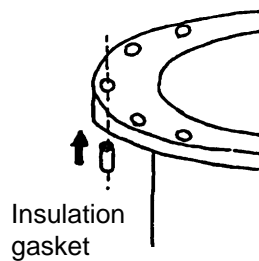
Laying the waterproofing gasket on the tank flange
